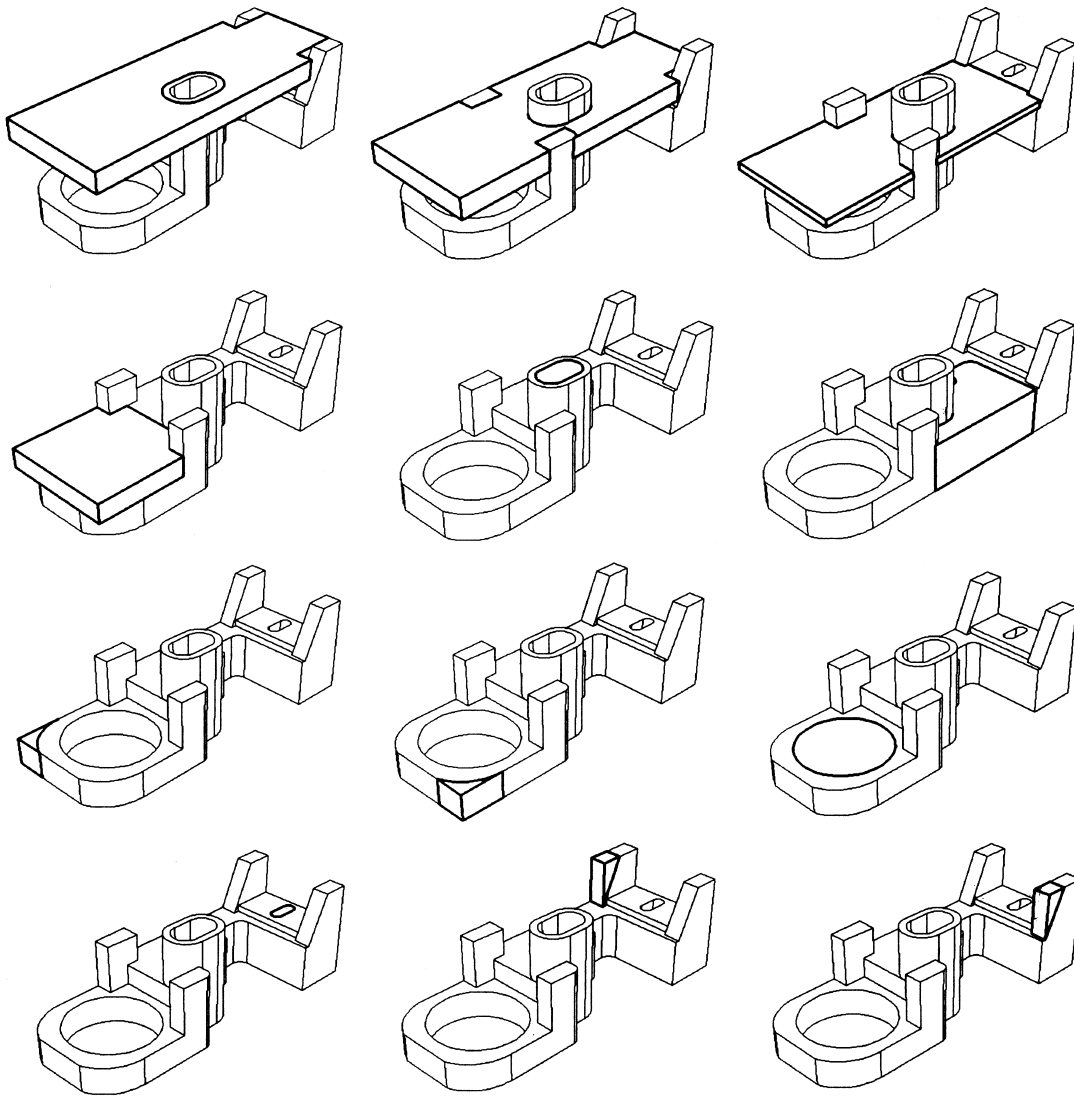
Extracted machining features to machine the example part shown in Fig. 5.
